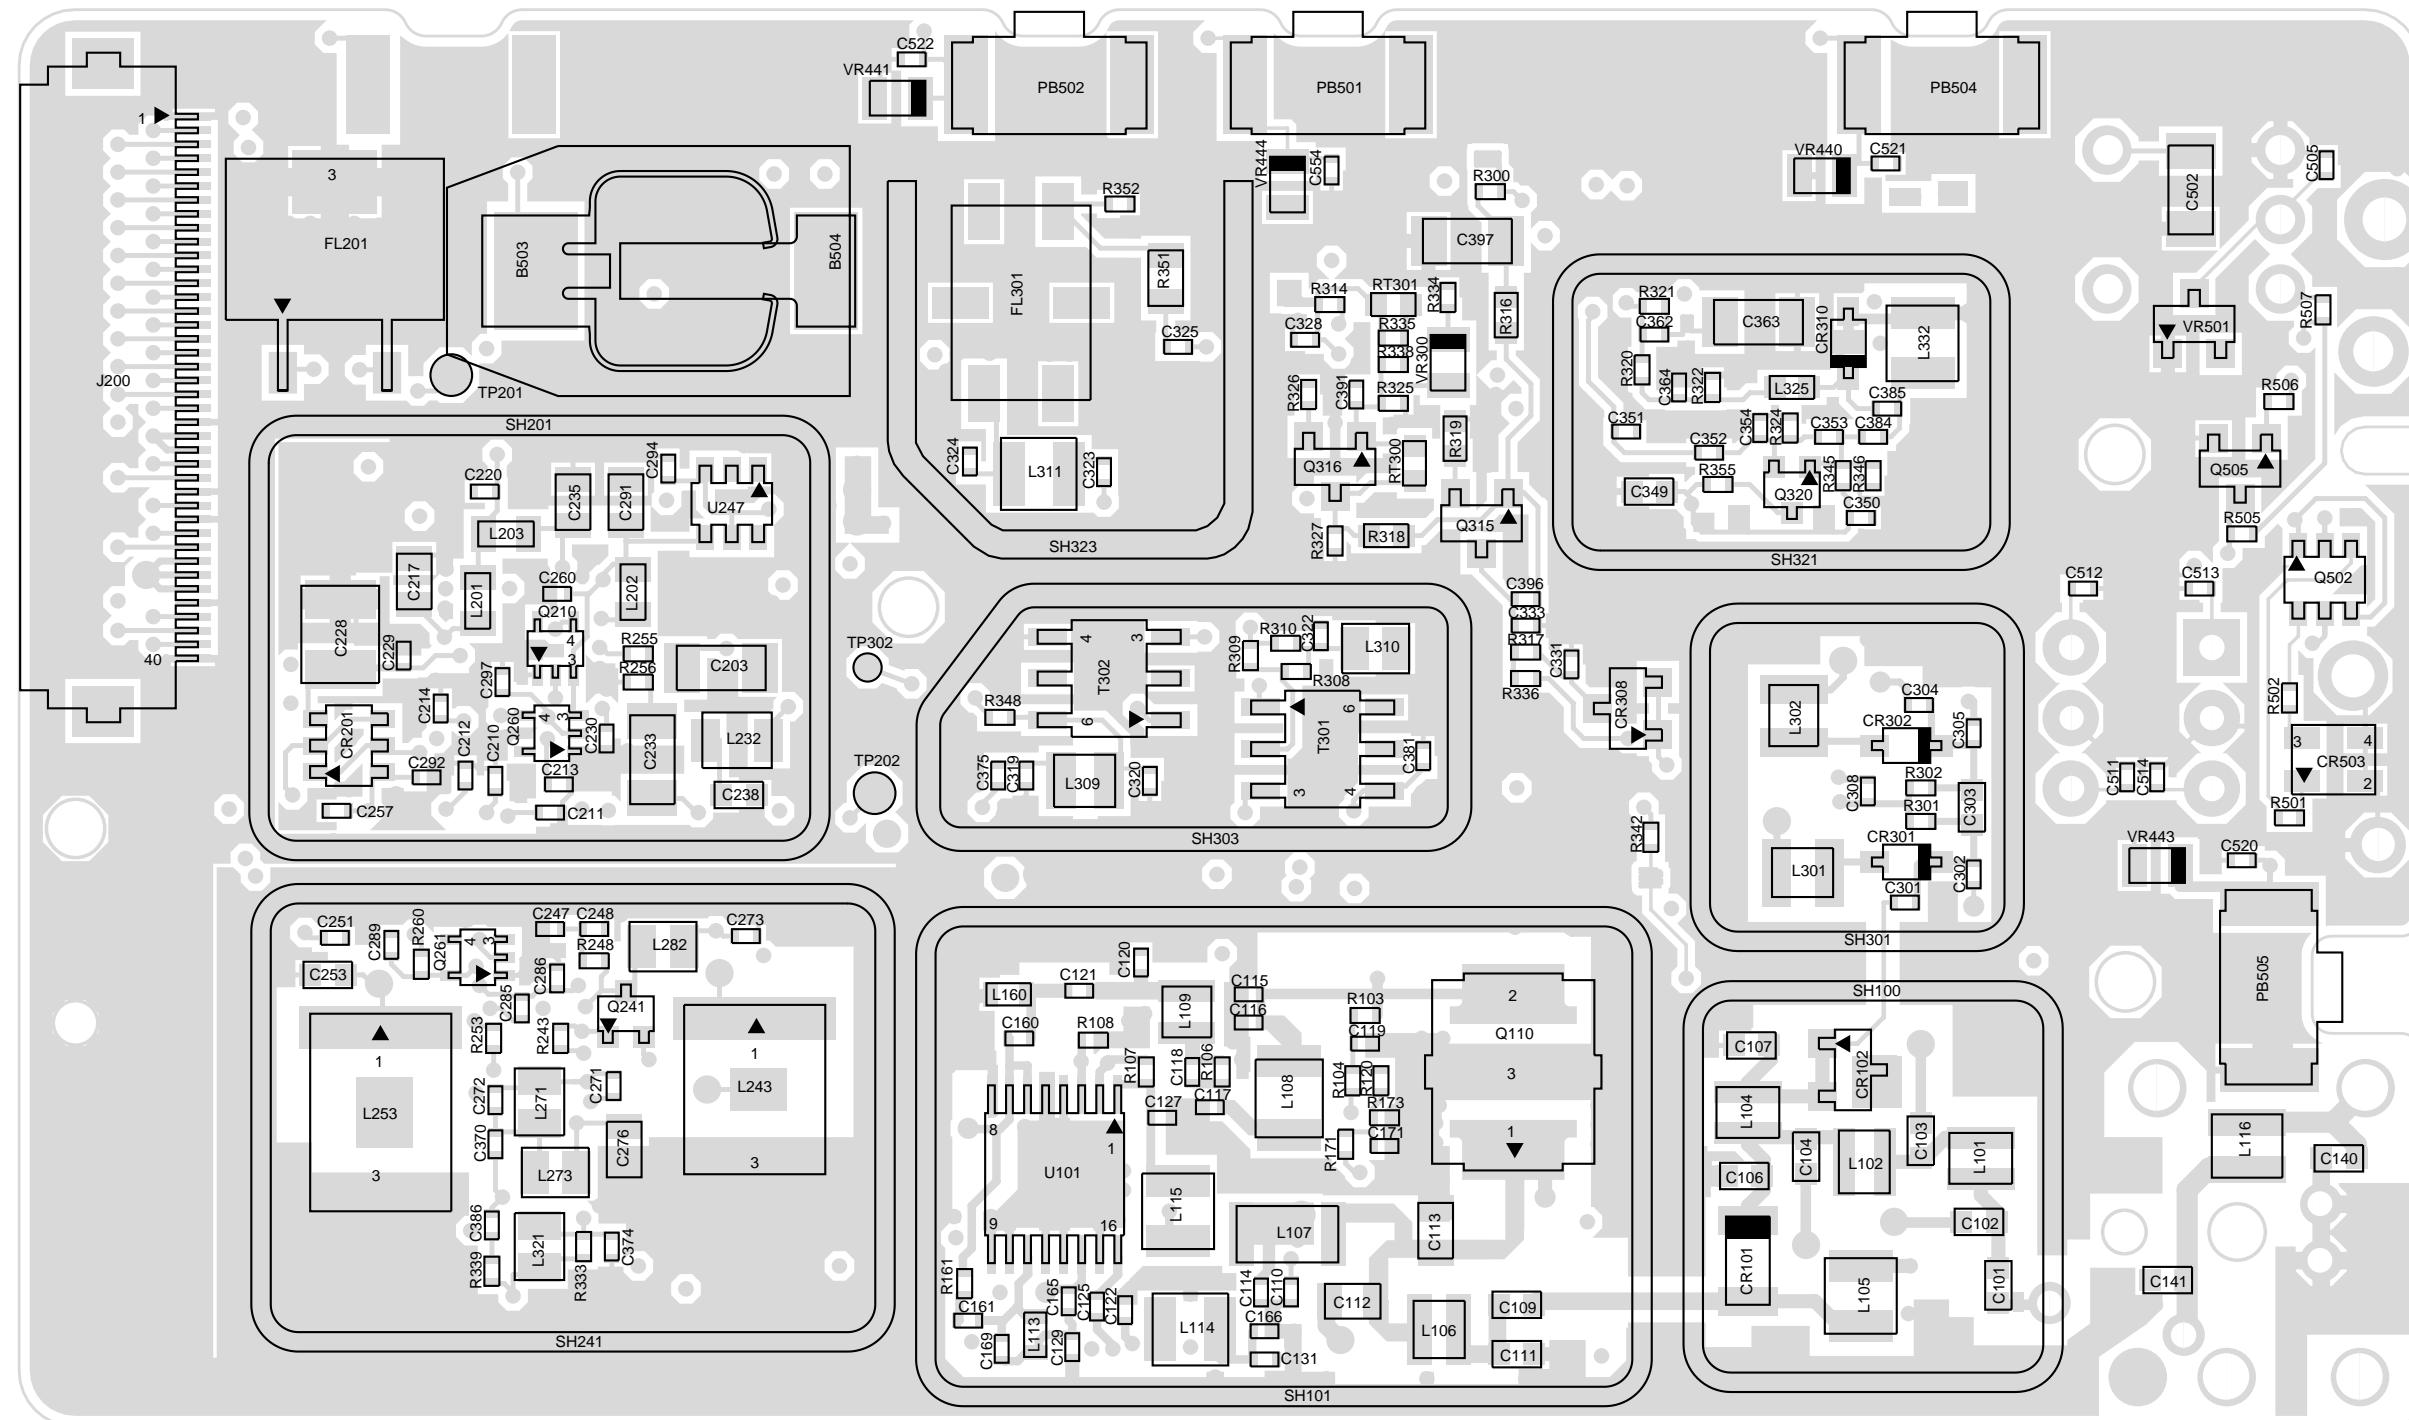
UHF (403-470MHz) Main Board Top Side PCB No. 8404077G01
